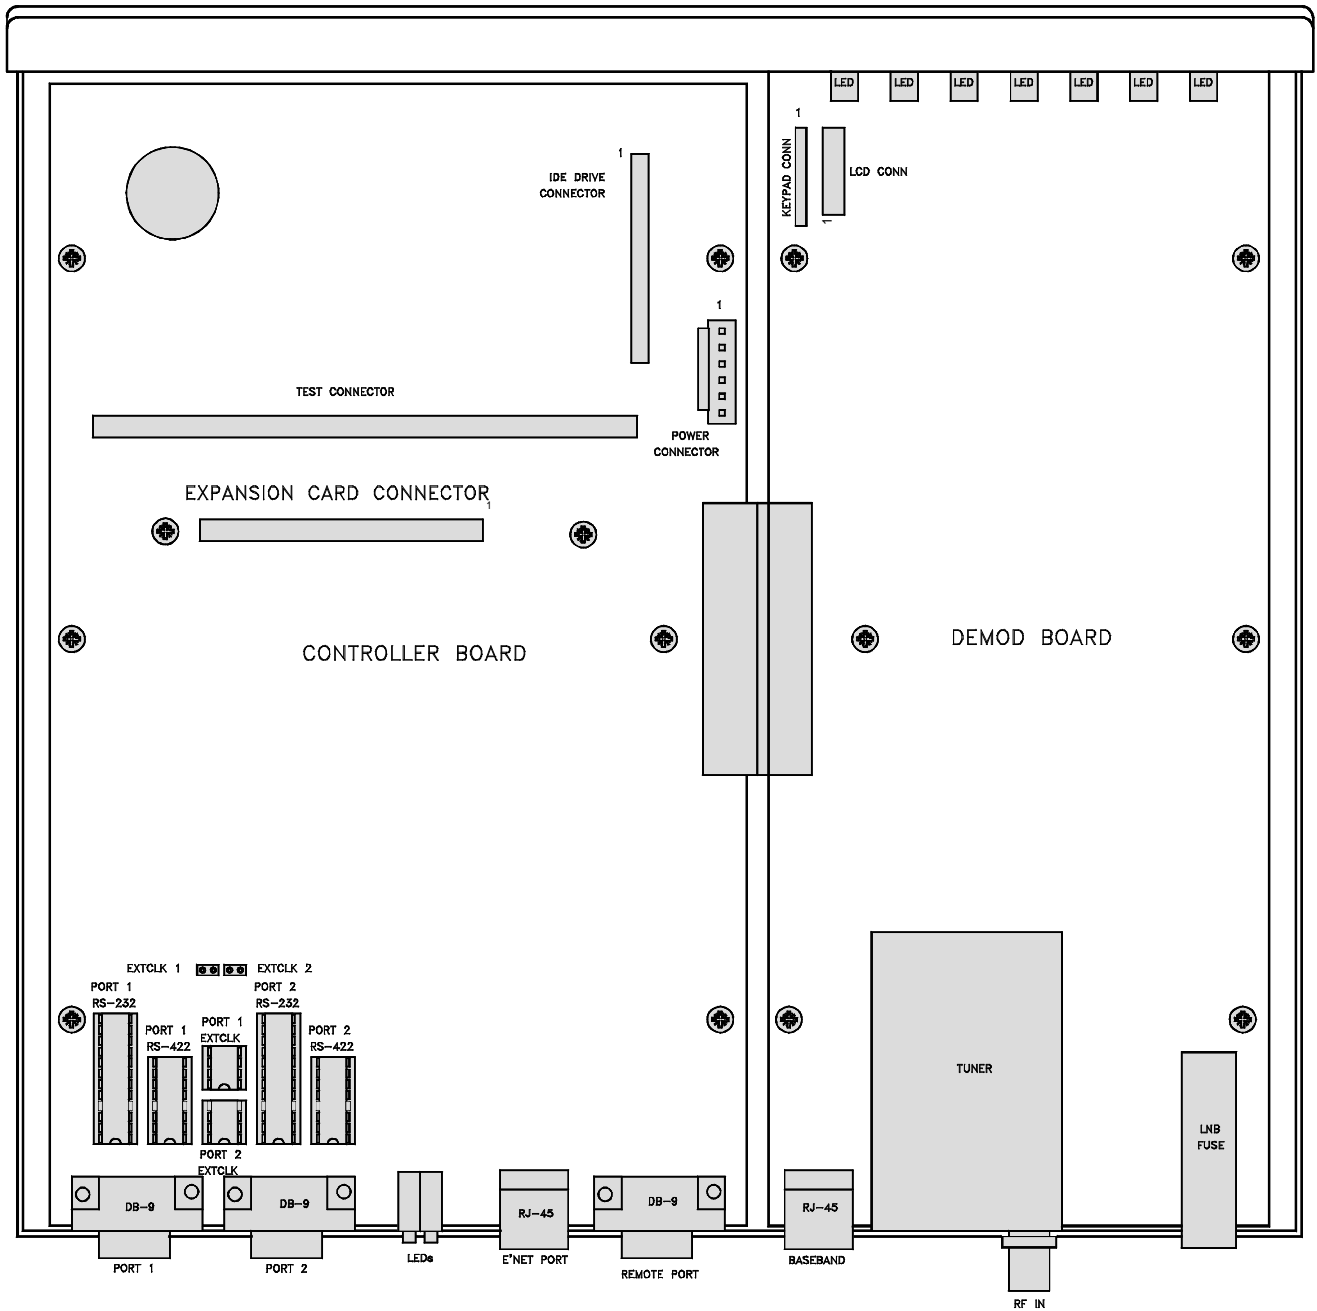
Simplified Drawing of Circuit Boards, Showing Location of Components
